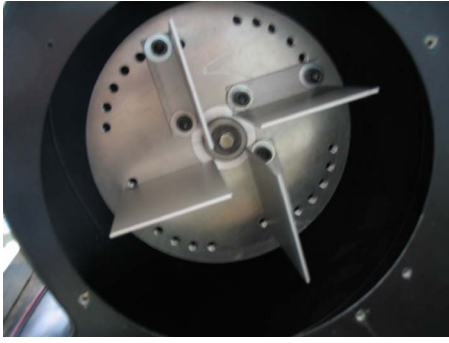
The four-bladed impeller configuration shown installed in the blower housing
